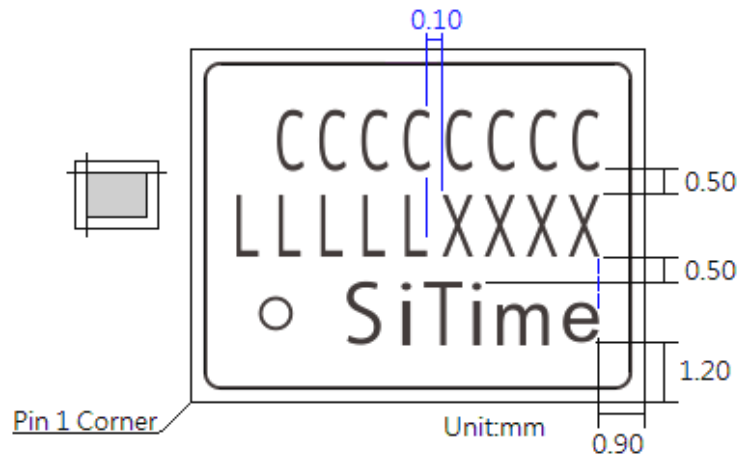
Marking Dimensions for Emerald Package (9.0 mm x 7.0 mm)
